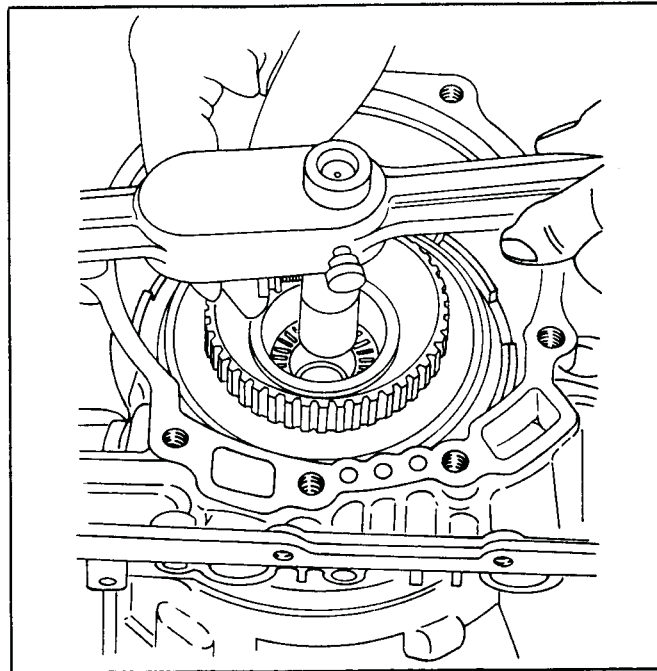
A-129 Measuring Rear Clutch Hub Bearing
